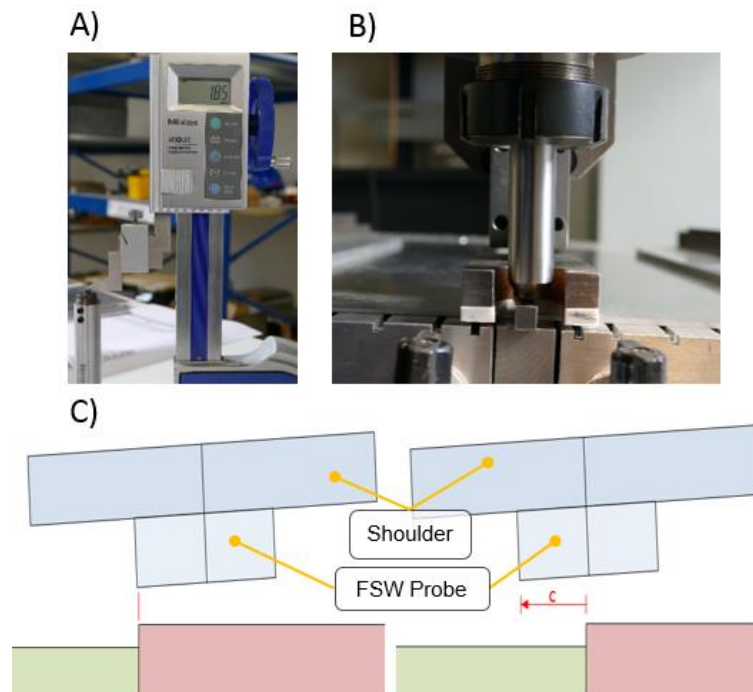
Stages of the pre-weld procedure: A) Probe height measurement; B) Tool alignment and calibration; C) Schematic drawing of the alignment process. (Courtesy of TWI,Ltd)
